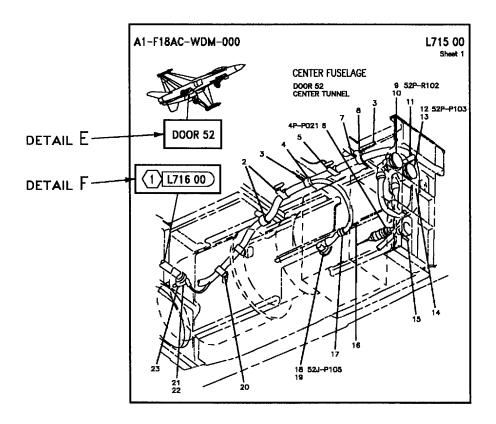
Installation and Removal of Cable Assemblies (Sheet 2)
